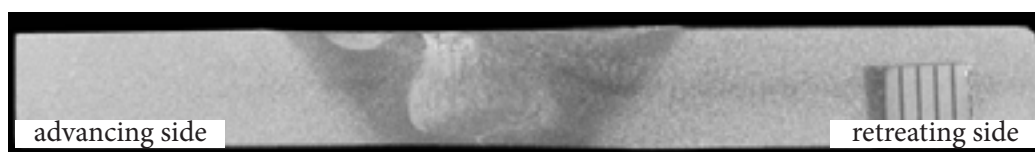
Macrostructure of the FSW weld made of aluminium alloy EN AW-6082; welding parameters $V_n = 450$ rpm, $V_z = 1120$ mm/min; Triflute type tapered tool; etchant: Keller's reagent [8]
